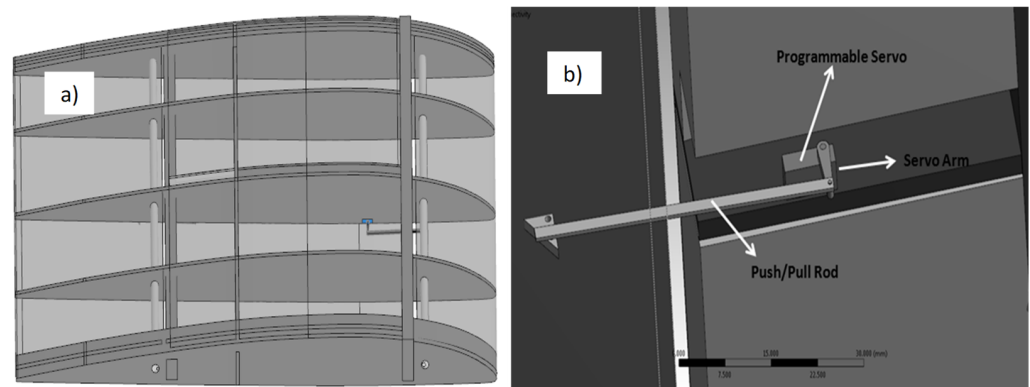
(a) Top view of the leading edge adaptive wing prototype; (b) actuator design is composed of a servo motor and a push/pull rod.
